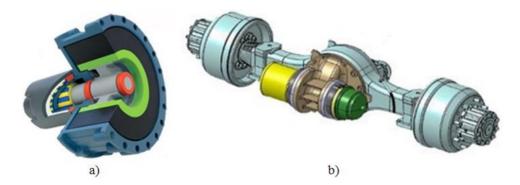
a) Ricardo's flywheel, b) Kinergy flywheel system integrated into a rear axle assembly [27]
